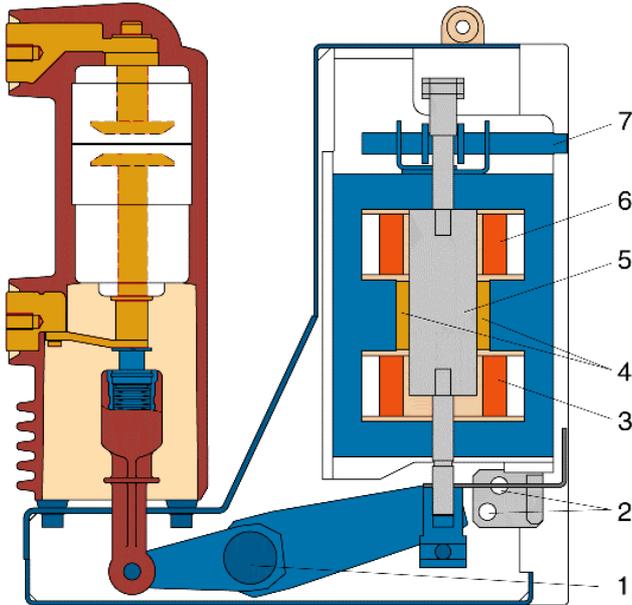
Section of the operating mechanism and pole part of the circuit-breaker
